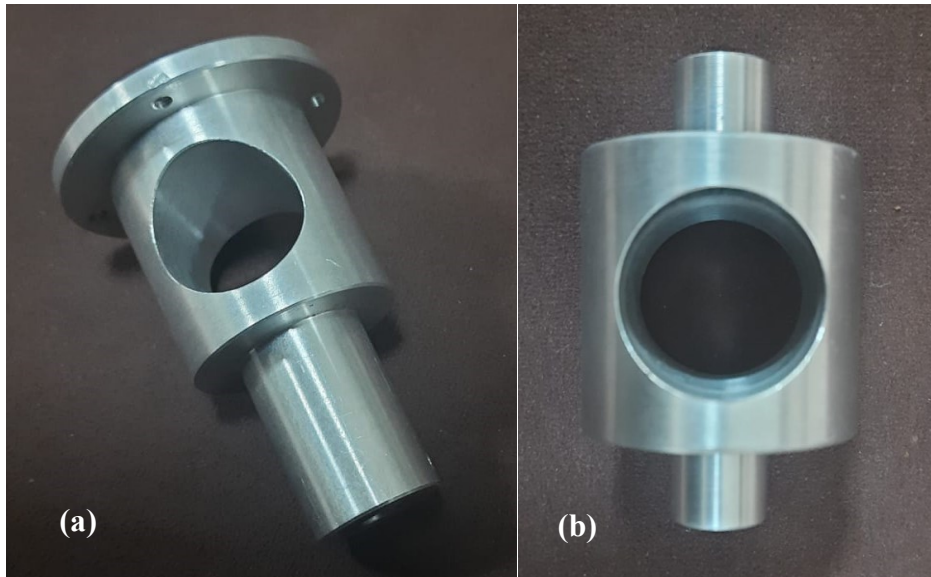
Manufactured shaft housings (a) pantograph shaft housing and (b) parallelogram shaft housings
